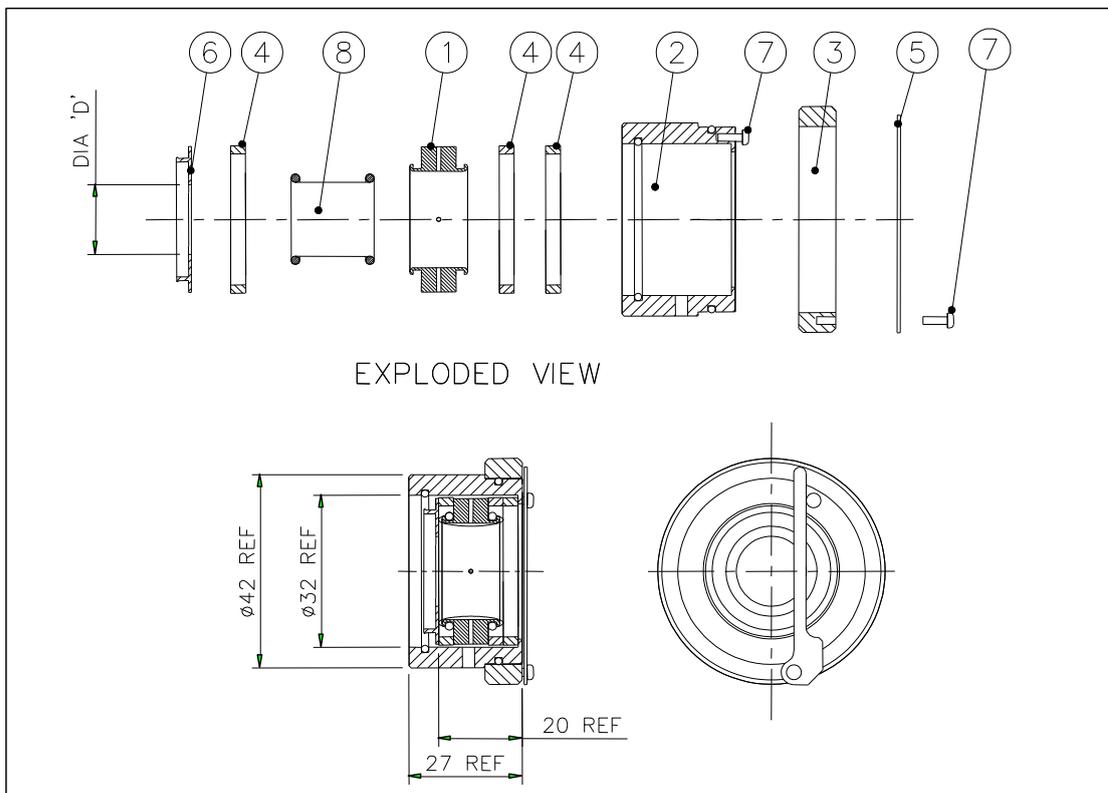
Example of Trap Assemblies for Cigars \varnothing 6.5 to 16.49 mm and \varnothing 16.5 to 22.5 mm
